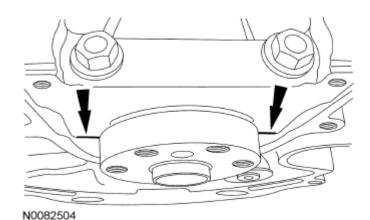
Locating Main Bearing Beam In Engine Block Courtesy of FORD MOTOR CO.
